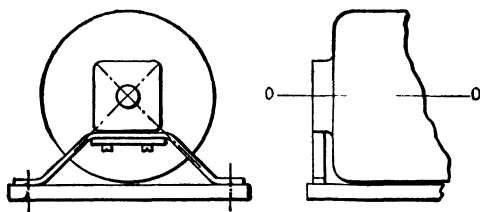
Small-motor spring support consisting of two 45-deg. sections passing through the center of the machine.
